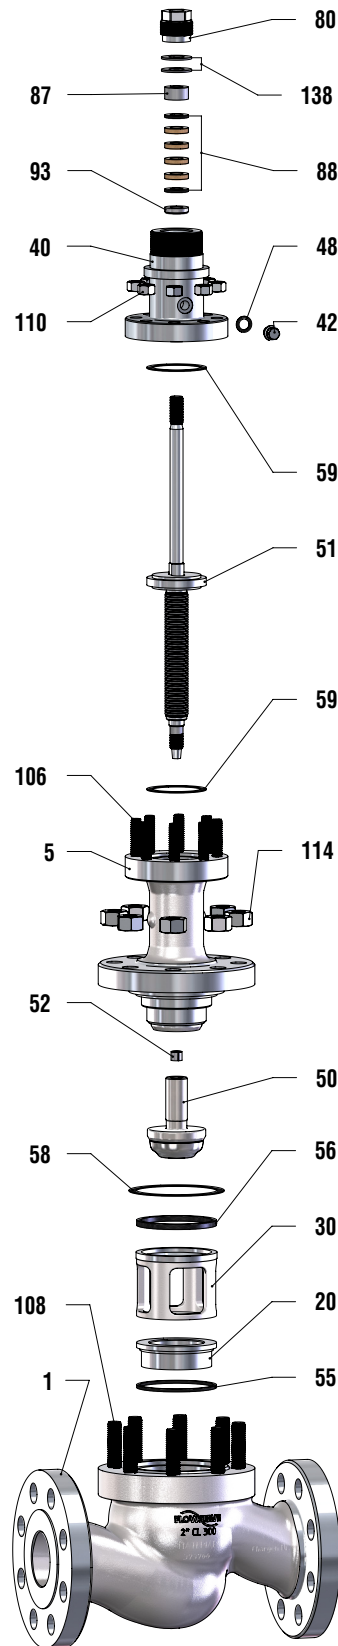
Disassemble / Reassemble the valve with bellows seal assembly for type A designs (Valve parts see Table 13, Page 17)
